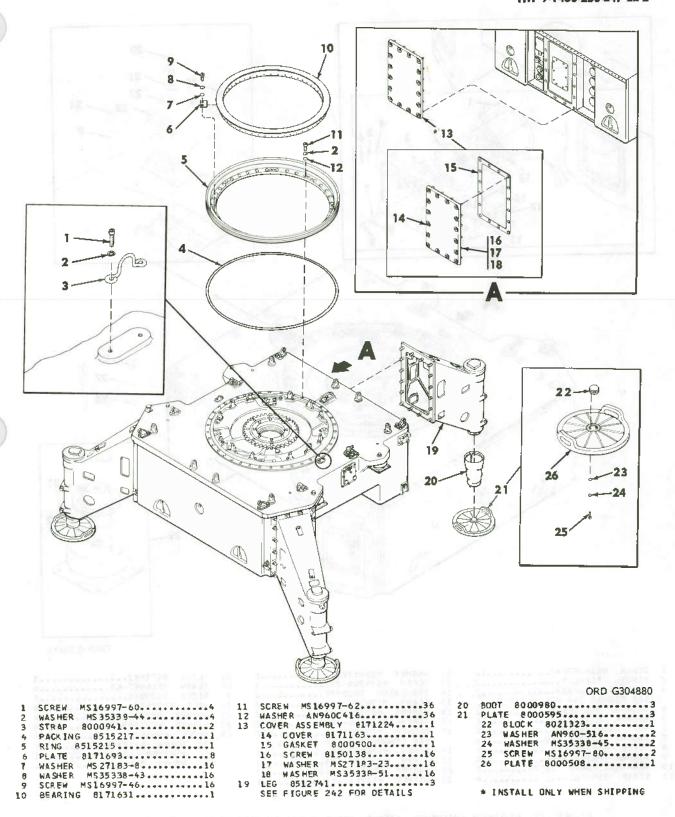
EQUIPMENT ENCLOSURE. AZIMUTH DRIVE /9136465/-PARTIAL EXPLODED VIEW /SEE FIGURE 161 FOR NEXT HIGHER ASSEMBLY/
